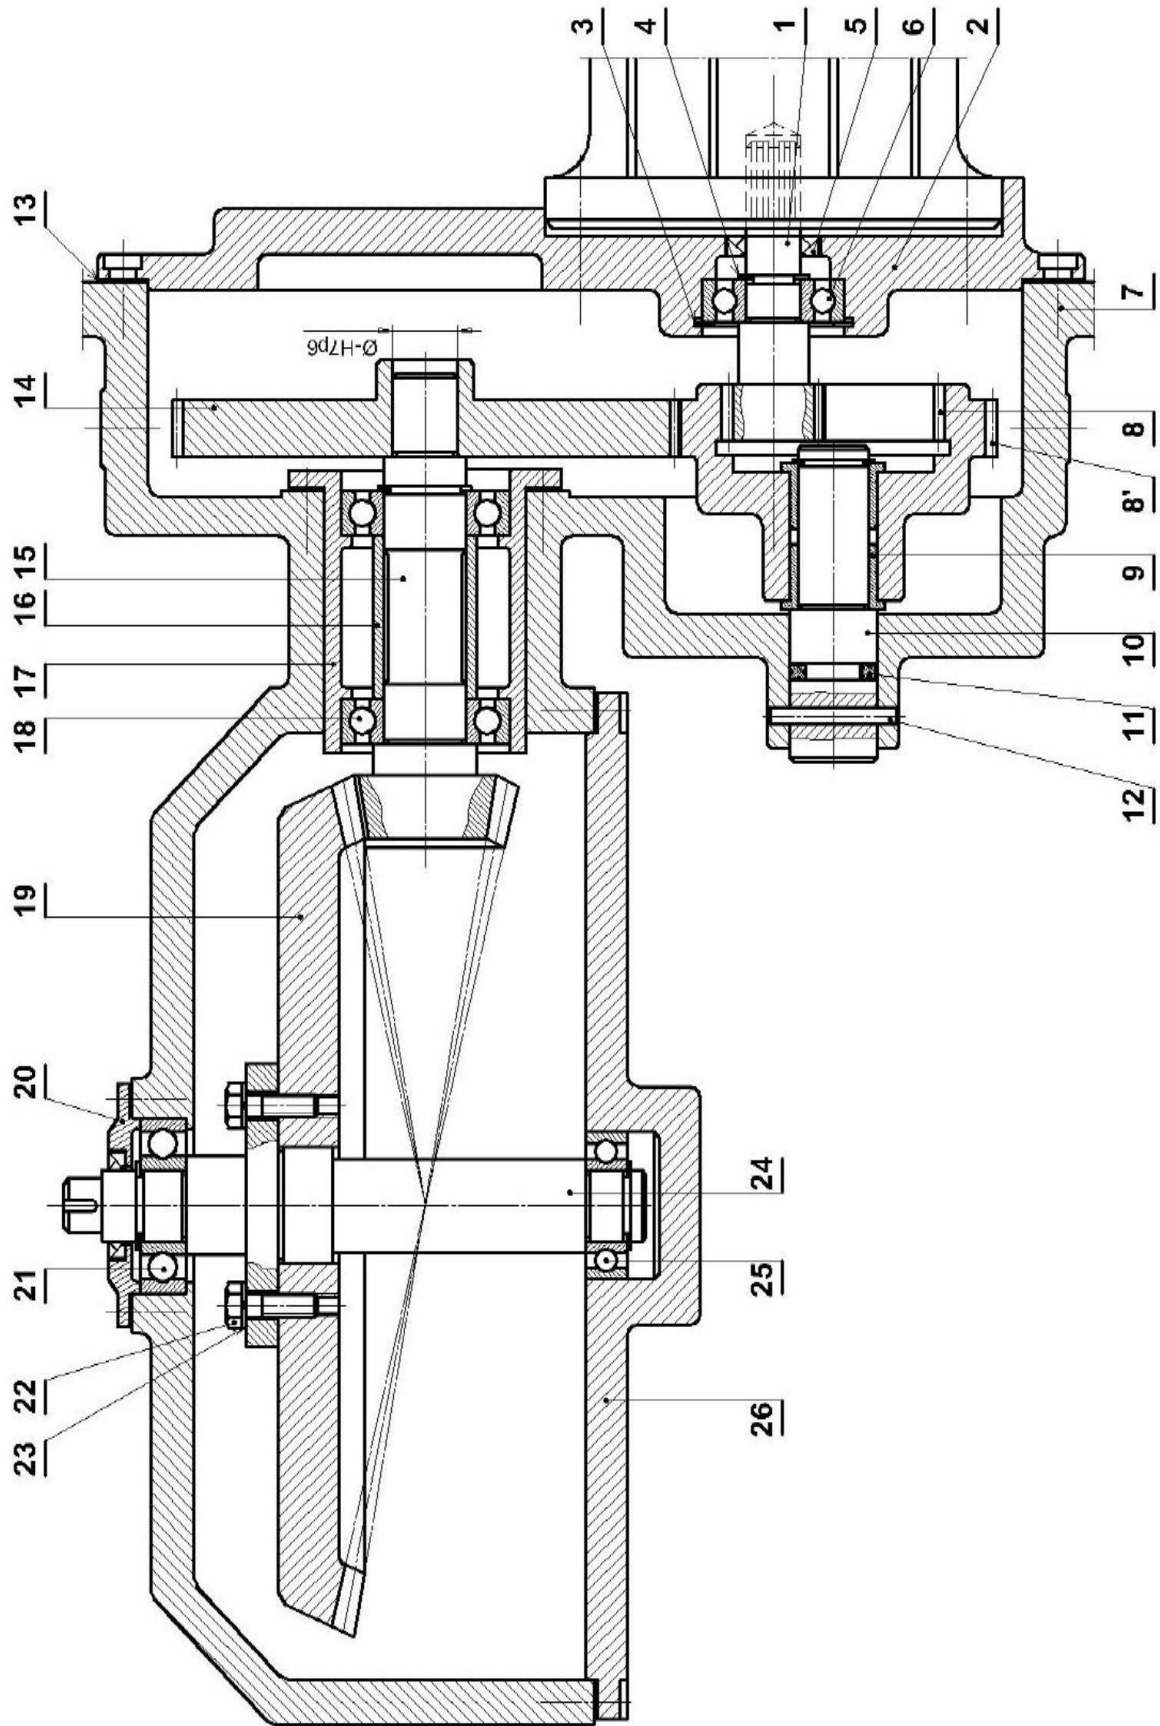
7: Bevel gears with spur internal and external gears
